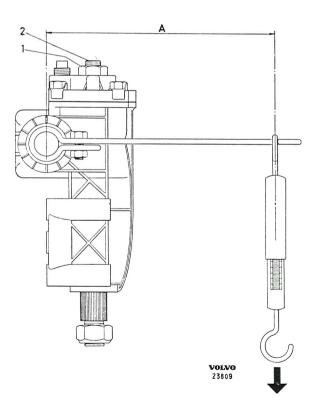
Checking the take-up between cam and roller  $A=210\ mm\ (approx.\ 81/4'')$  1. Lock nut  $\ \ 2.$  Adjusting screw
